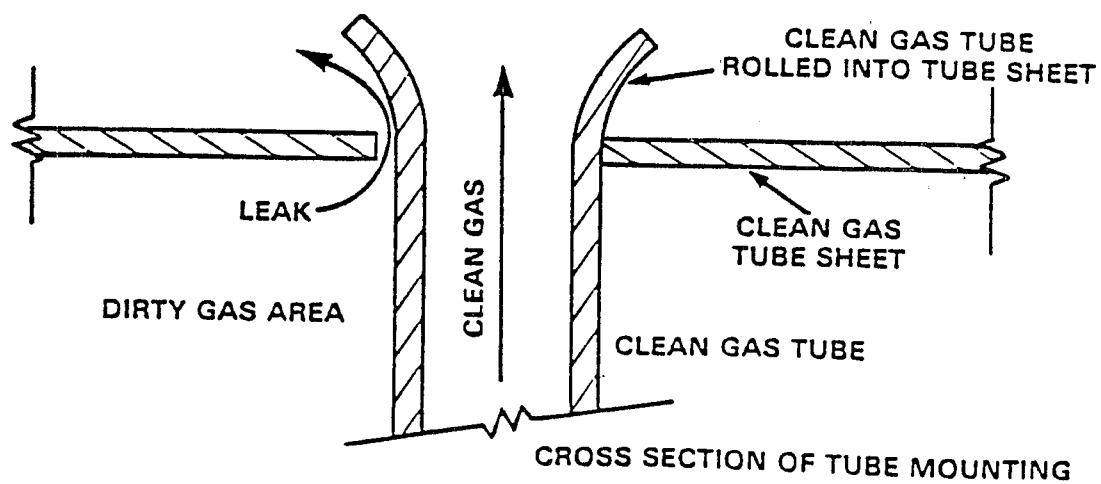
Example of leaks in clean gas outlet tubes and clean gas tube sheet.
